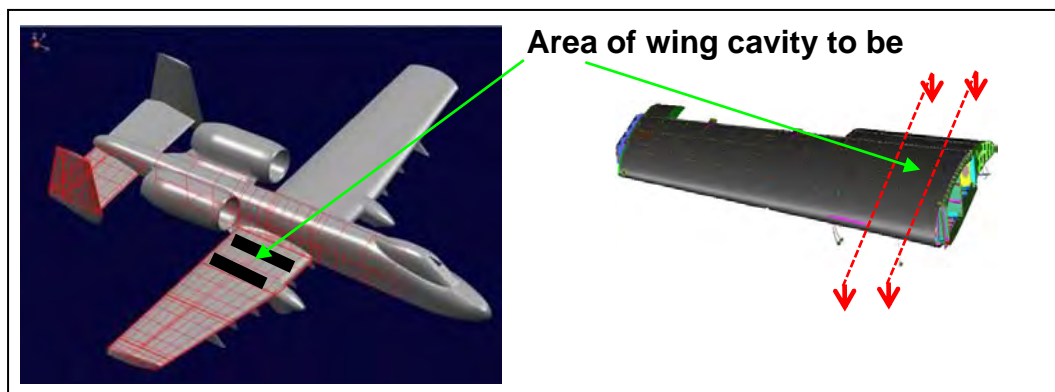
CAD view of an A-10 aircraft and wing showing the general location of the selected limited access inspection.
